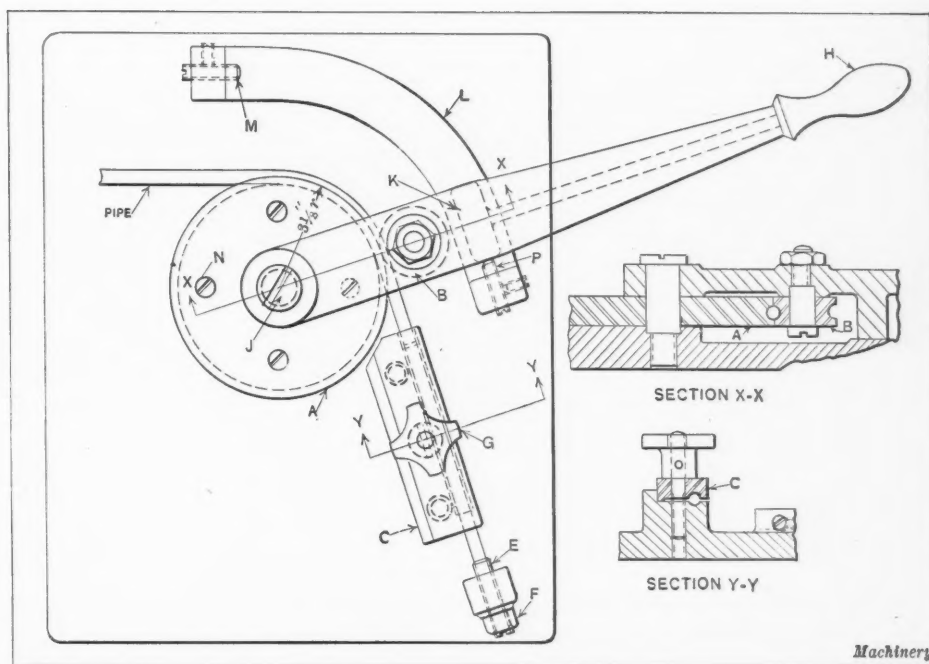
Fixture for making Bend shown at A, Fig. 2
